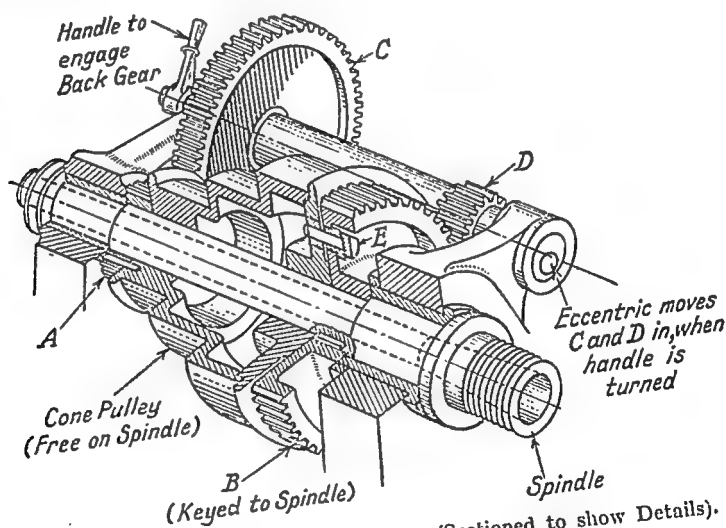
Cone Drive with Back Gear (Sectioned to show Details).
